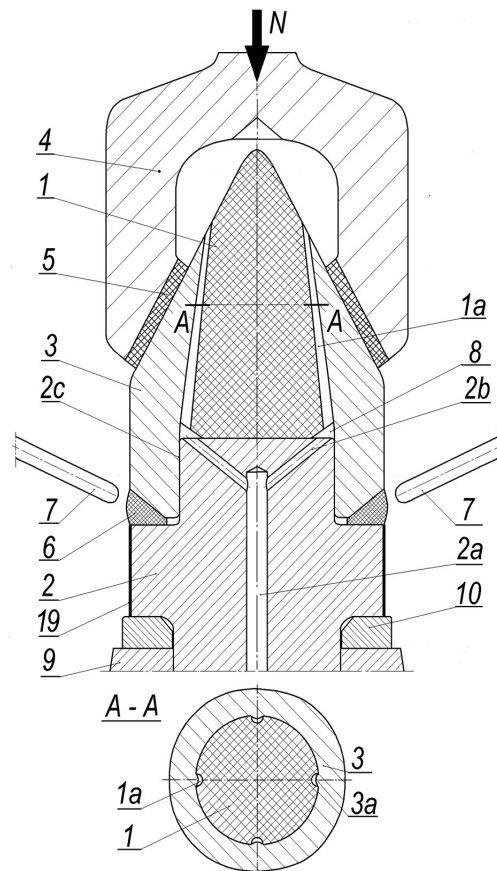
Longitudinal cross-section of the pick tip, showing the method of mounting the carbide tip in the pick shank, as well as the pick cooling and cutting zone spraying system
